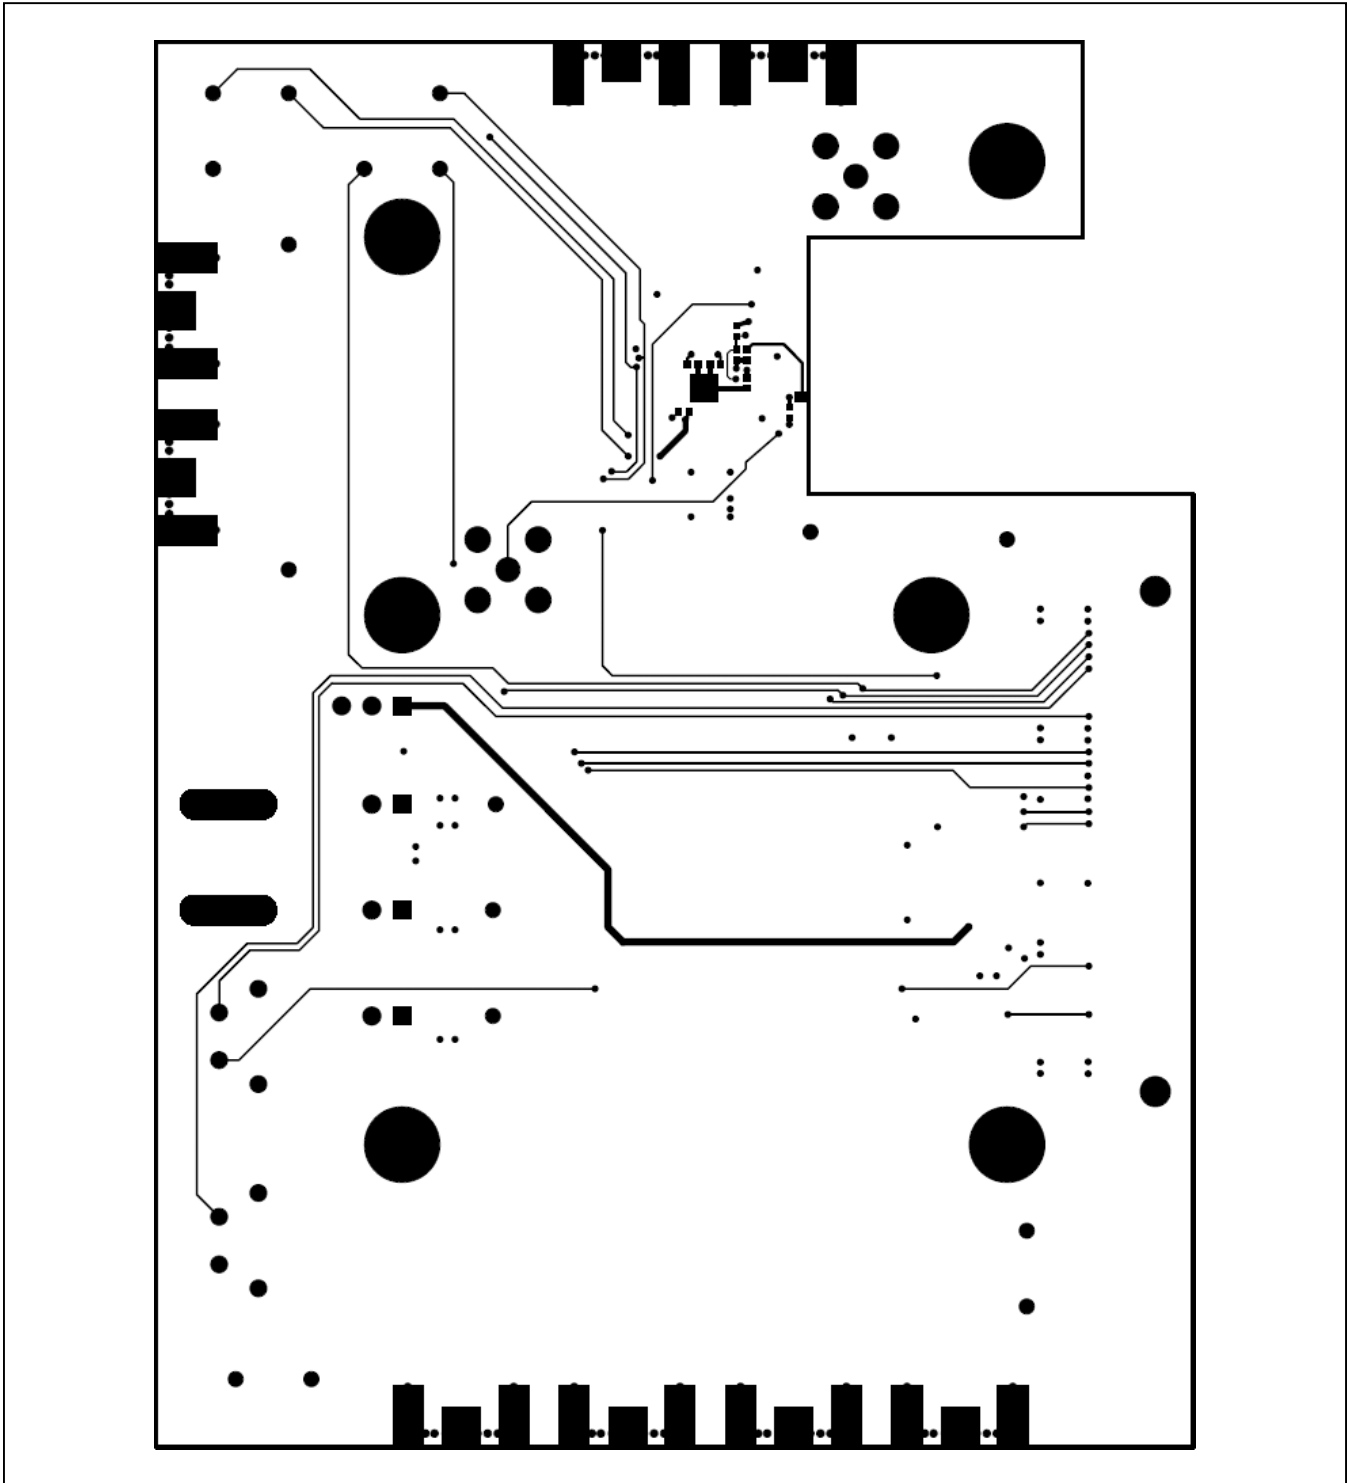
MAX3710 EV Kit PCB Layout—Solder Side
